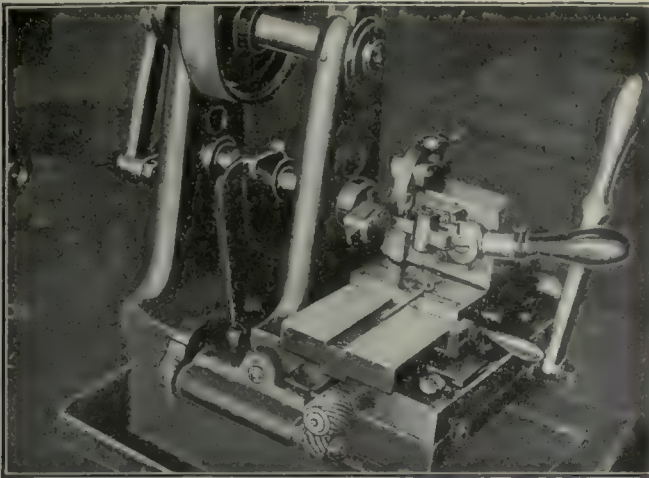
"DIGGING OUT." A METHOD THAT COMPETES WITH MILLING
